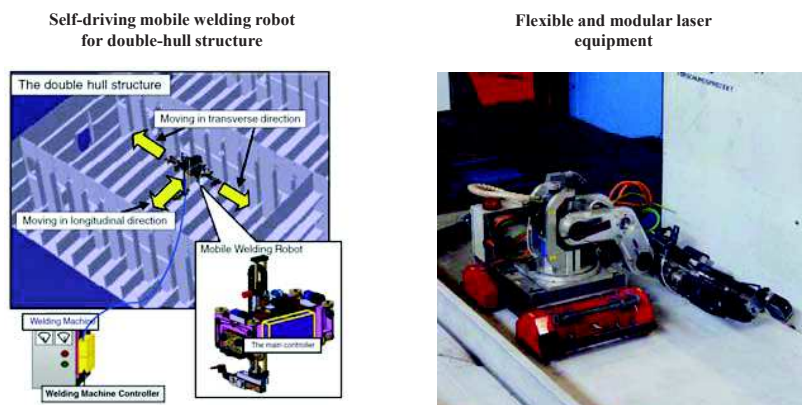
Examples of recently developed automated welding robots, (Ku et al., 2010) and (BESST, 2013)
